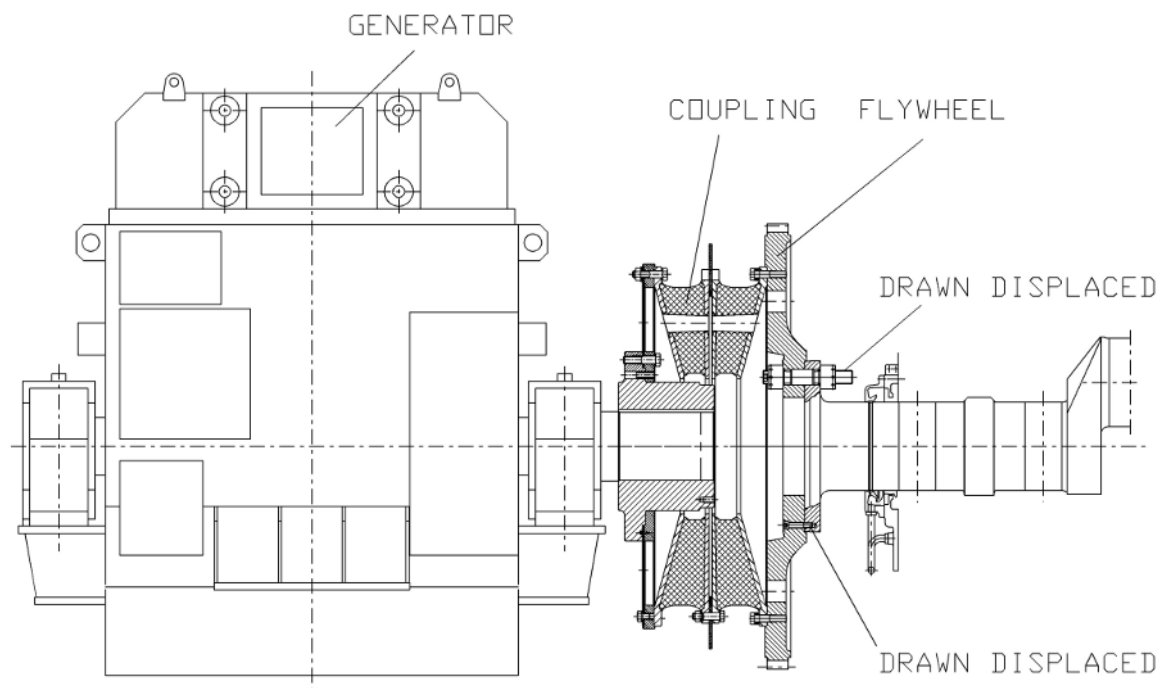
Example for an arrangement of flywheel, coupling and gearbox
